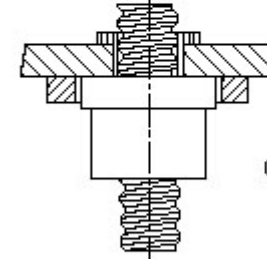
Drawing A. The support nut is fastened to the load with special screws which allow the support nut to adapt to the position of the threaded spindle.
